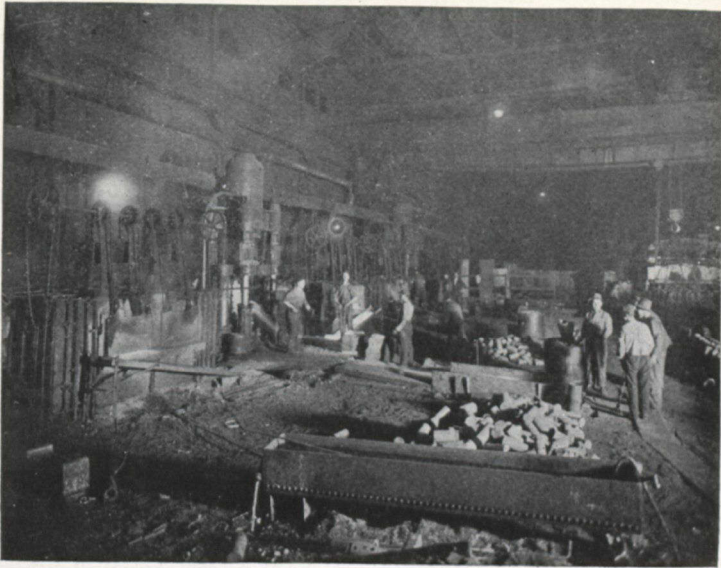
Canada Car & Foundry Shell Forging Plant.
